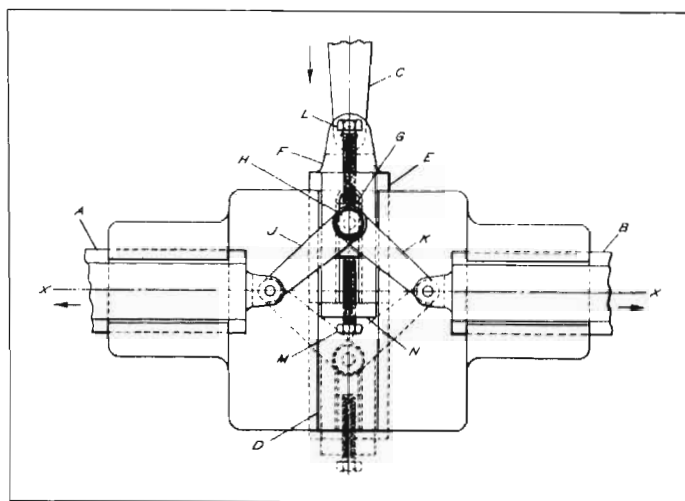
An adjustable mechanism which drives two opposed slides from a single reciprocating rod.
